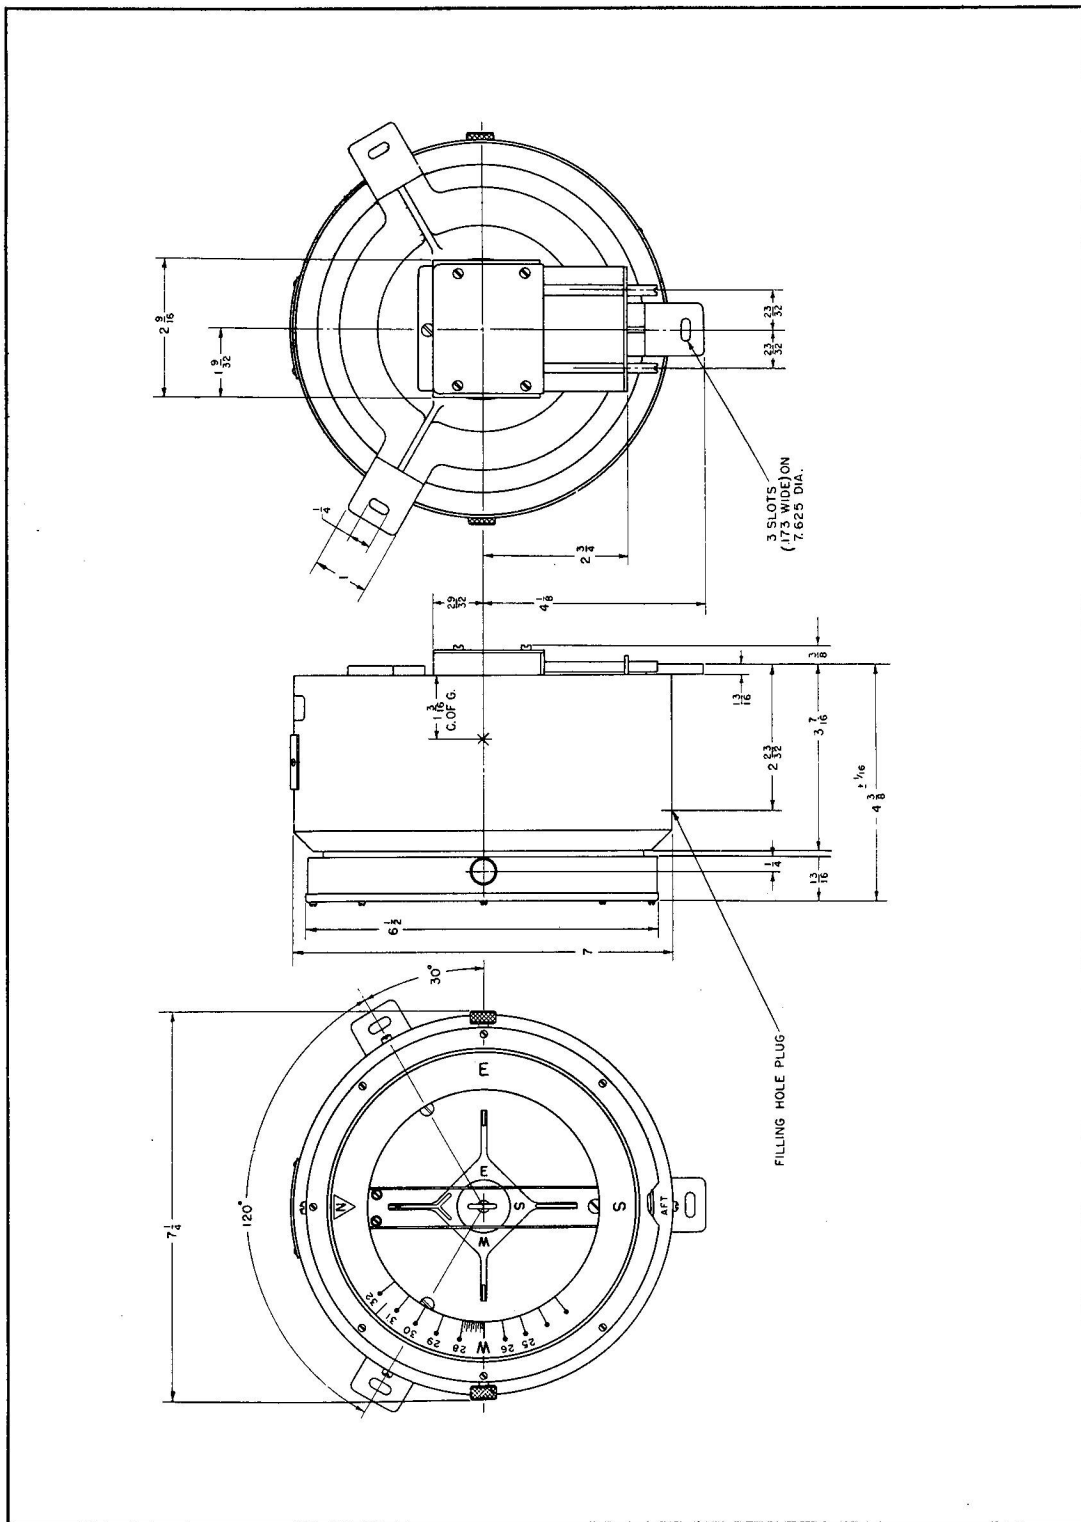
Dimensional Drawing - (Pioneer Type 1826-1-A)
